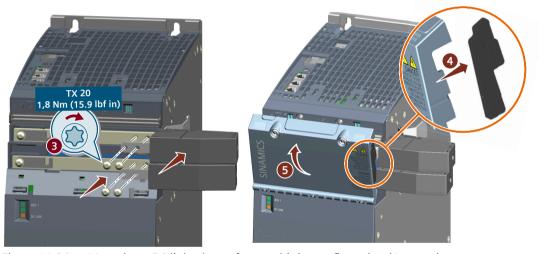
Mounting a DC link adapter for a multi-tier configuration (4 screws)
